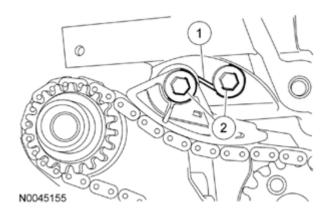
Identifying Oil Pump Chain Drive Tensioner And Shoulder Bolts Courtesy of FORD MOTOR CO.
